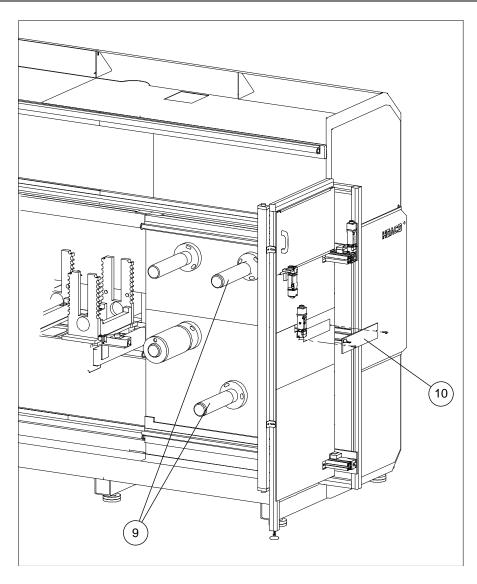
Installing air shaft (9) Air shaft (10) Safety door 3
